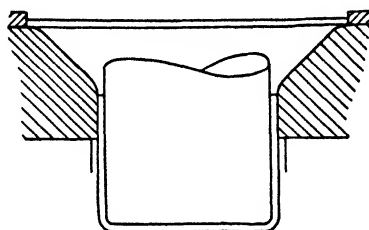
Single-action drawing, without a blank-holder, of a blank which is thick enough relative to its diameter to preclude wrinkling.
